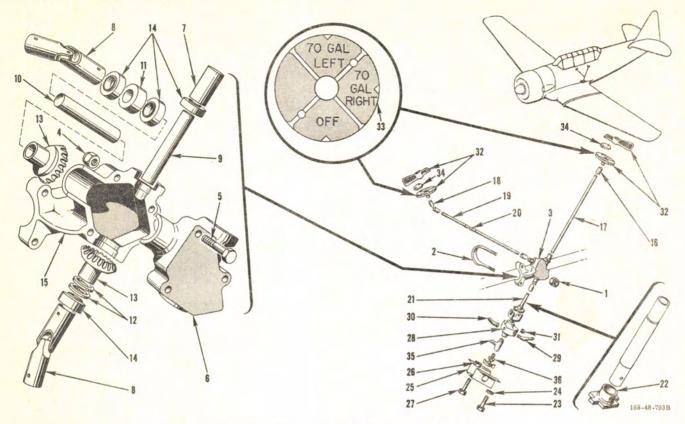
FUEL	COCK	CONTROL	AND	ATTACHING	PARTS
